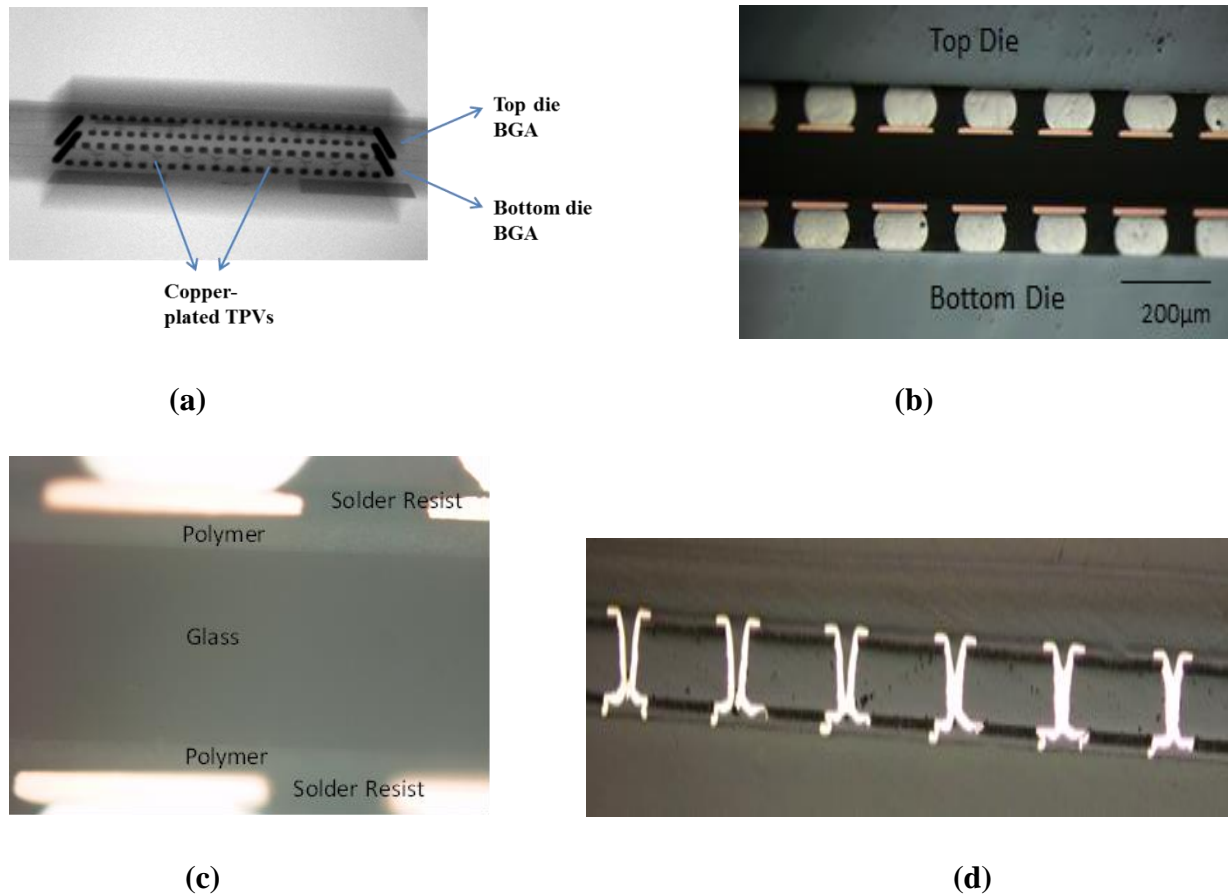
(a) X-ray image of interposer after IC assembly, (b) Cross-section of test vehicle with double-side assembly, (c) sample stack-up and (d) TPV array connecting the top and bottom ICs.
